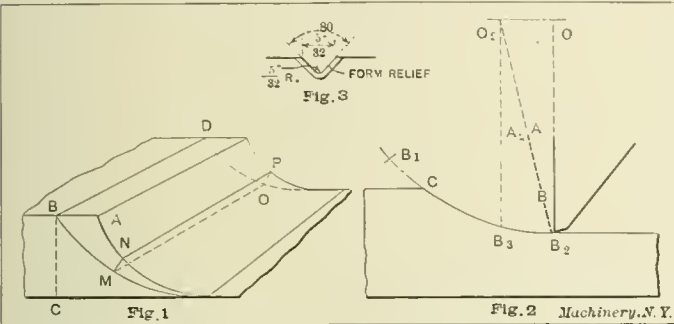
Metal Chip assumed to be produced by Milling Cutter without Distortion. Fig. 2. Diagram to illustrate Action of Milling Cutter. Fig. 3. Detail View of Chip Breaker
